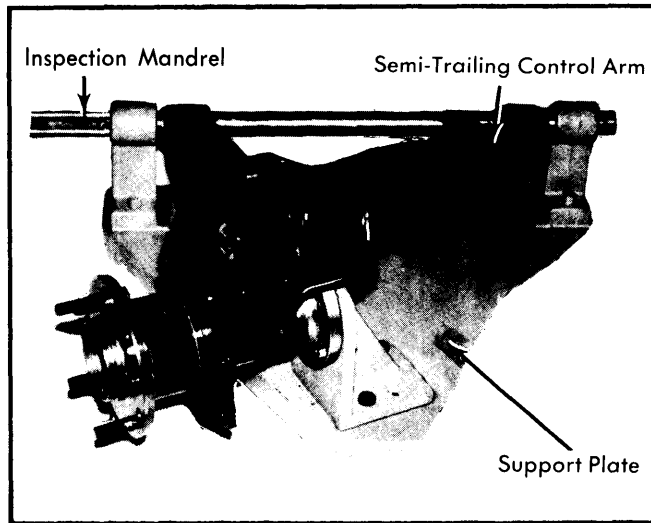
Trailing Arm Fitted to Support Plate to Check Alignment
